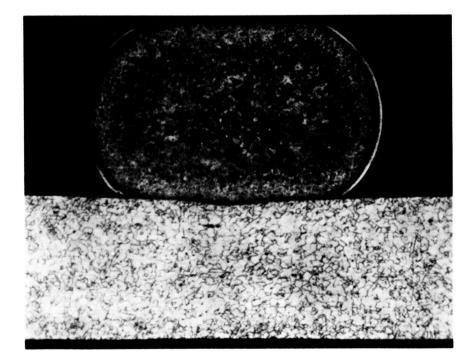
Weld joint 1.3.86; gold plated Kovar wire to Inco ribbon; sterilized; 150x magnification; Carapella + nitric-acetic etch (02324).
